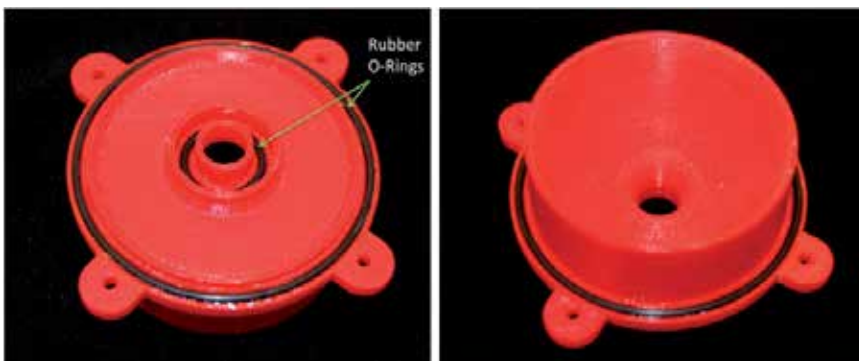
Middle Seal with rubber O-rings (Left: Top view; Right: Bottom view).
